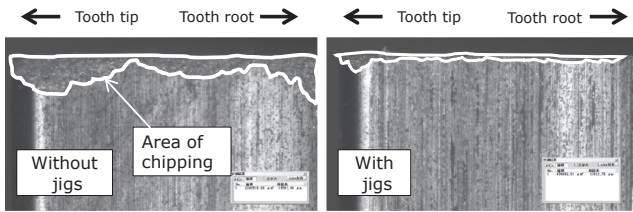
Workpiece chipping (tooth face, on the tool withdrawal side)
